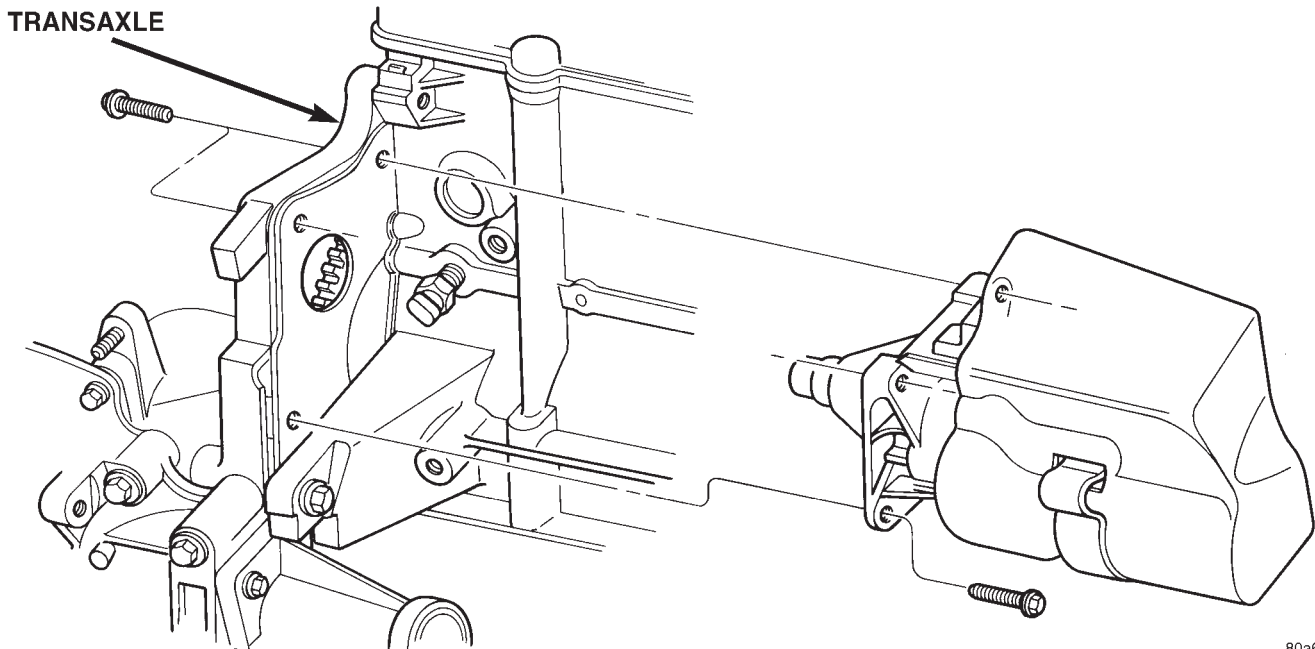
Starter - 2.4L Engine with Manual Transaxle
